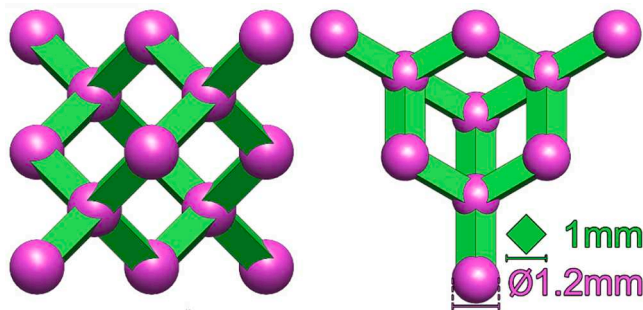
Unit cell of the 3D printed lattice in front and isometric views.
